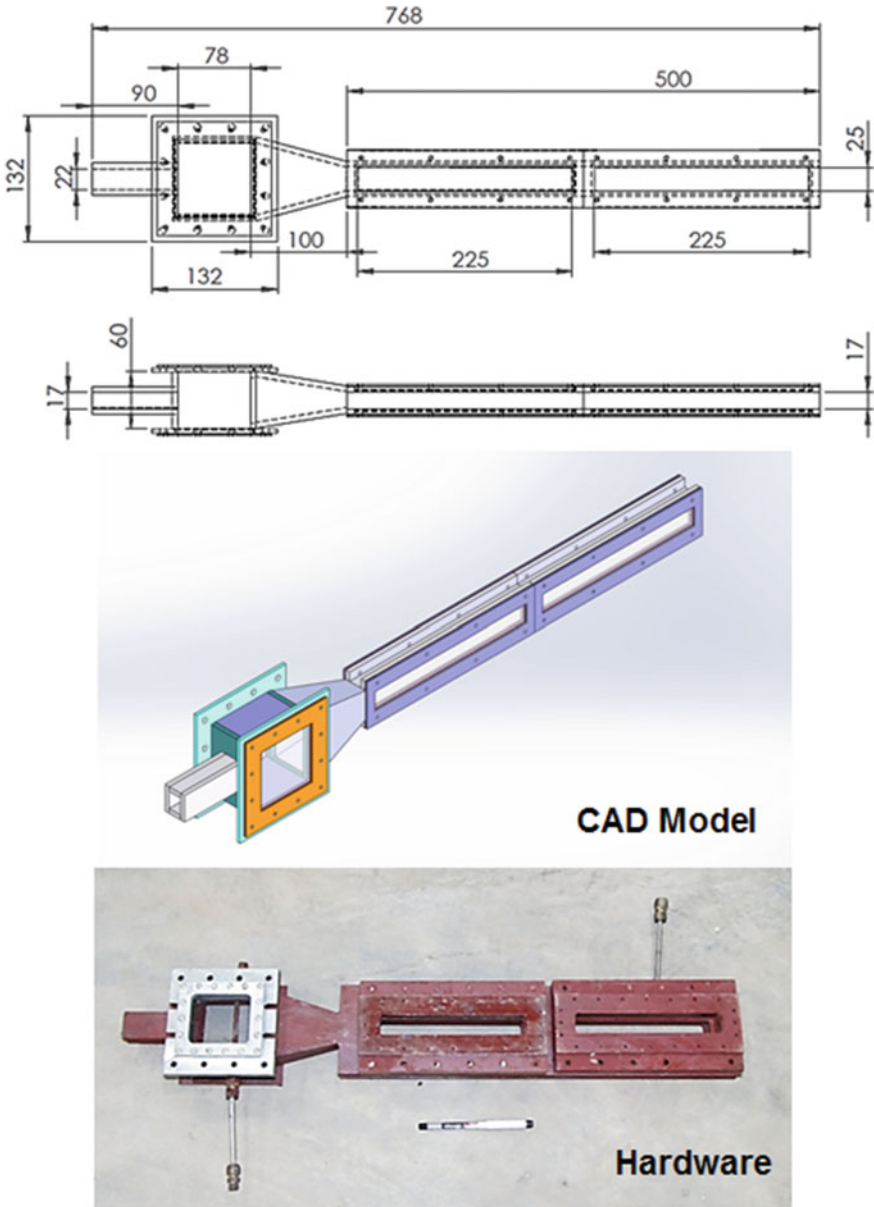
Dimensional details of the rectangular cross-sectional optically accessible valveless pulsejet engine and the hardware
